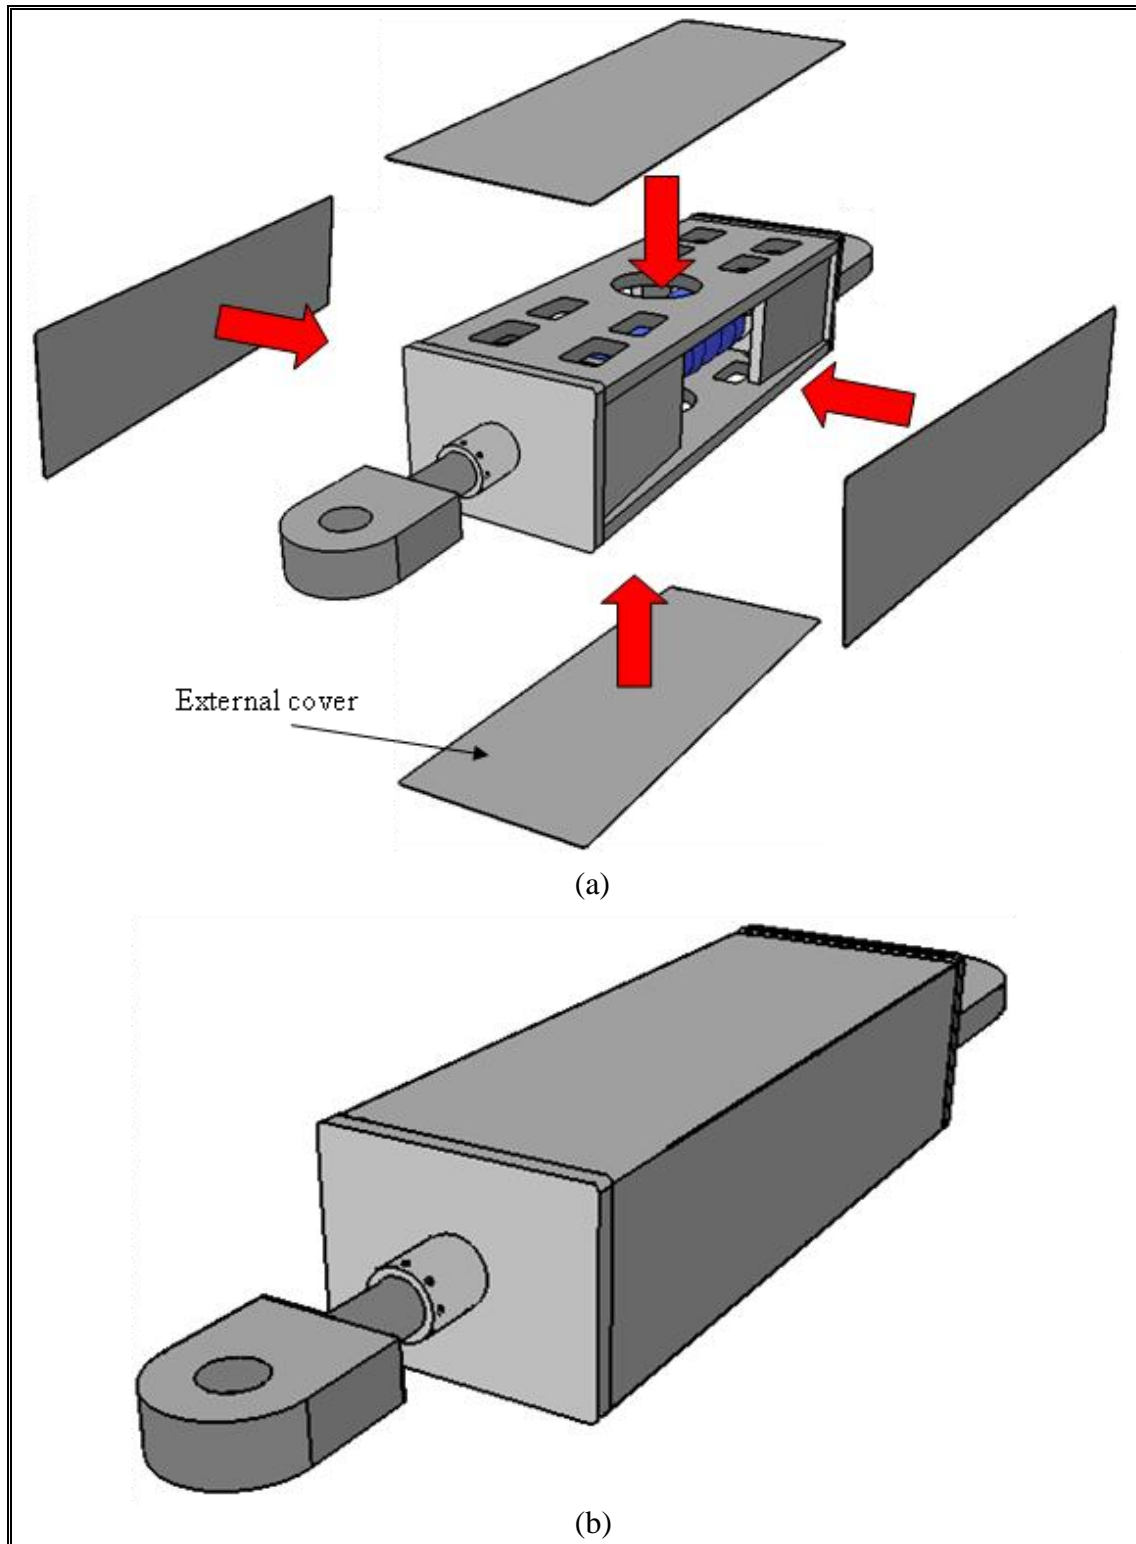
(a) Schematic assembly of the external covers. (b) Final device assembled
